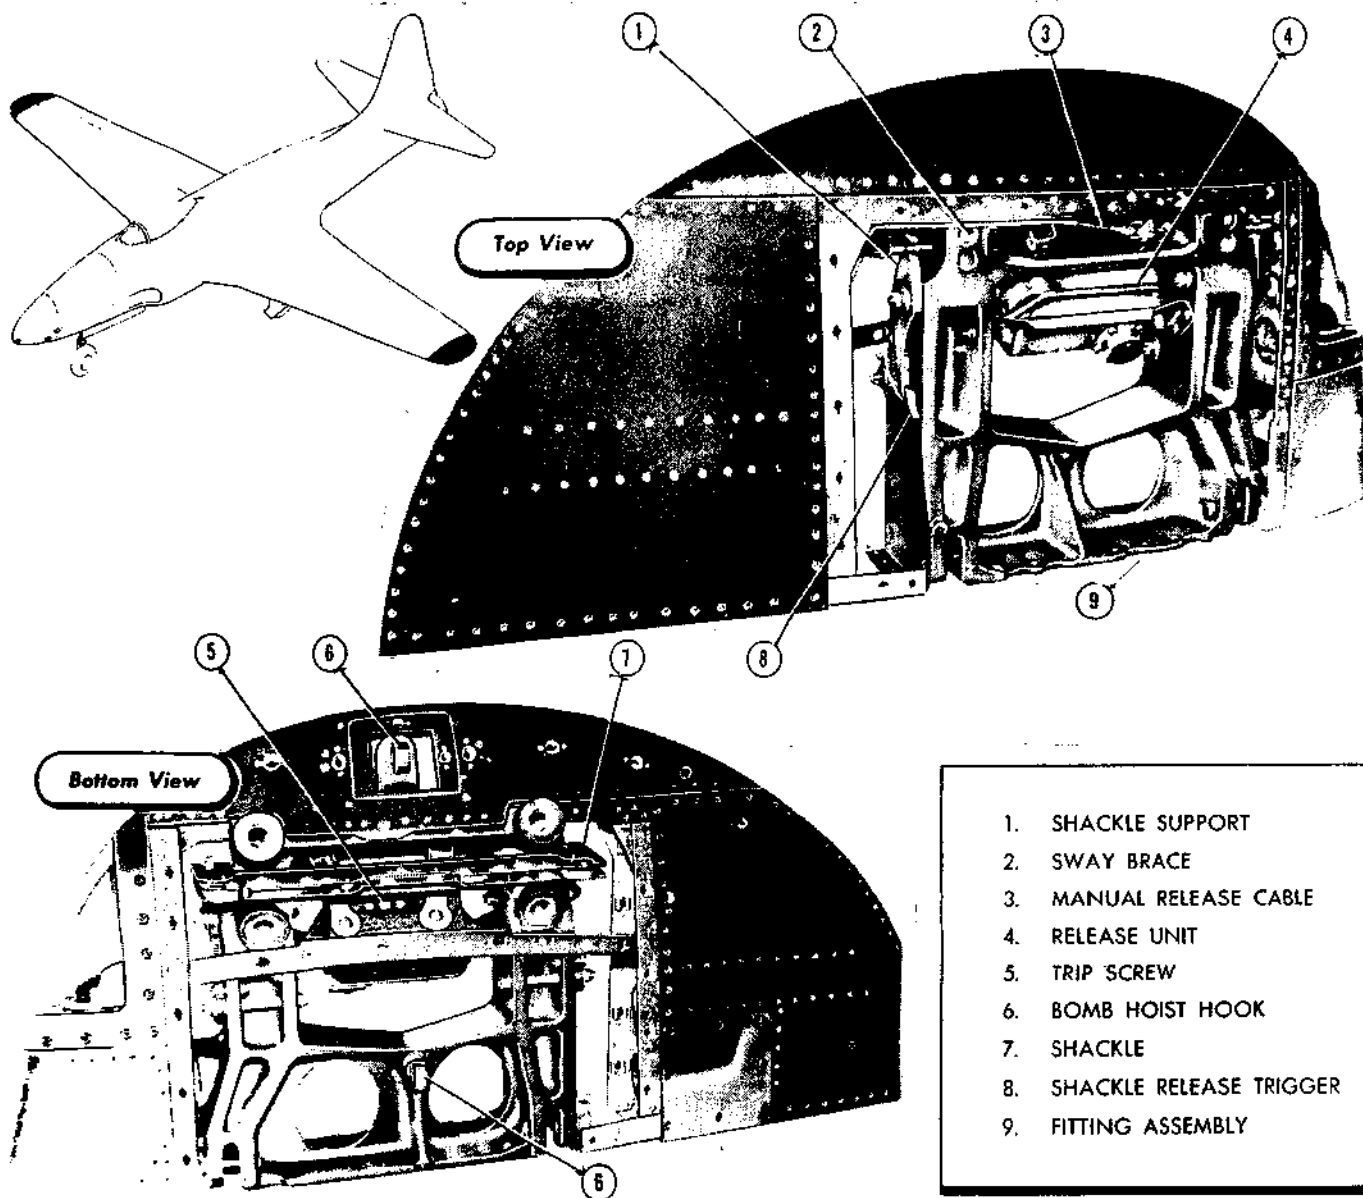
Bomb and Fuel Tank Carrying Equipment, Early Airplanes
